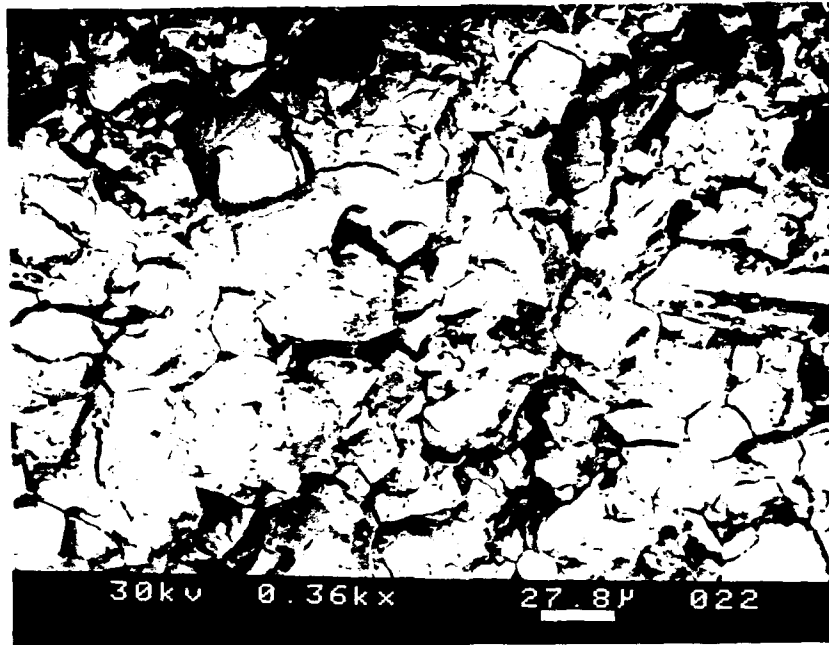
Fractograph of secondary crack showing intergranular cracking. Backscatter emission (360X).
